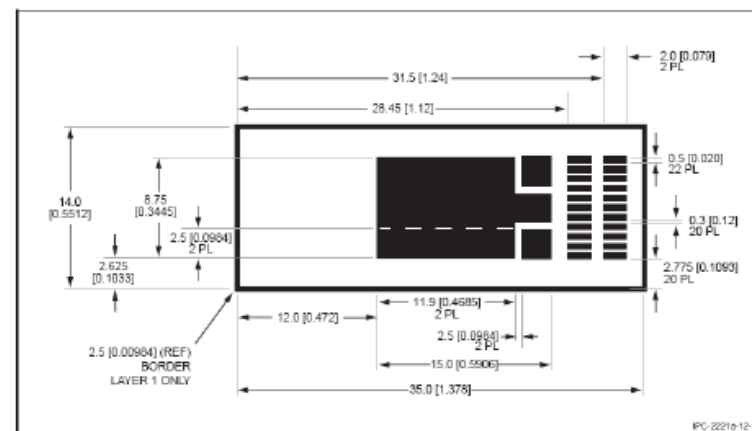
Test Coupon M. Surface Mounting Solderability Testing, mm [in]
